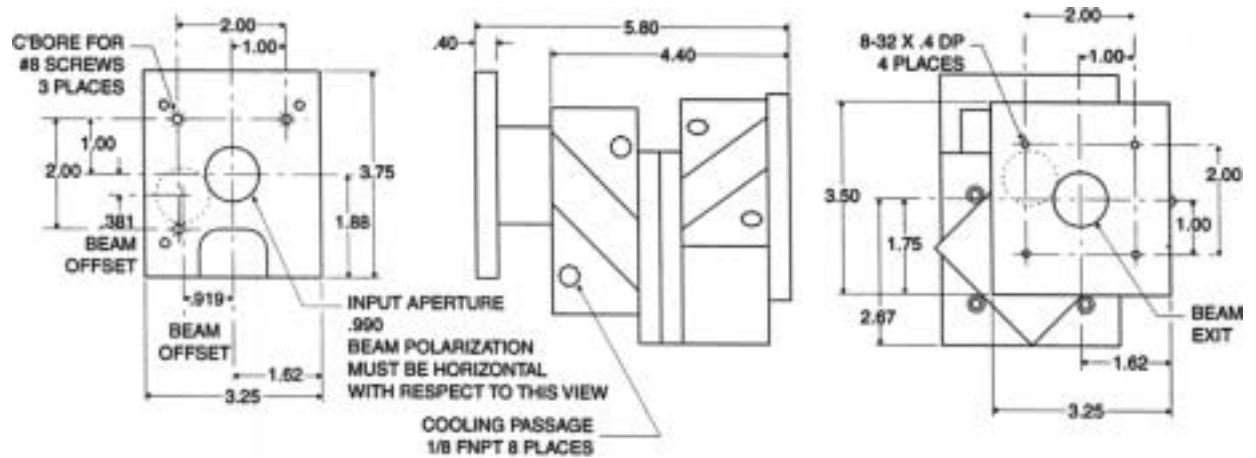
Installation Dimensions for Coherent Isolator/CQE Assembly 0175-990-00
